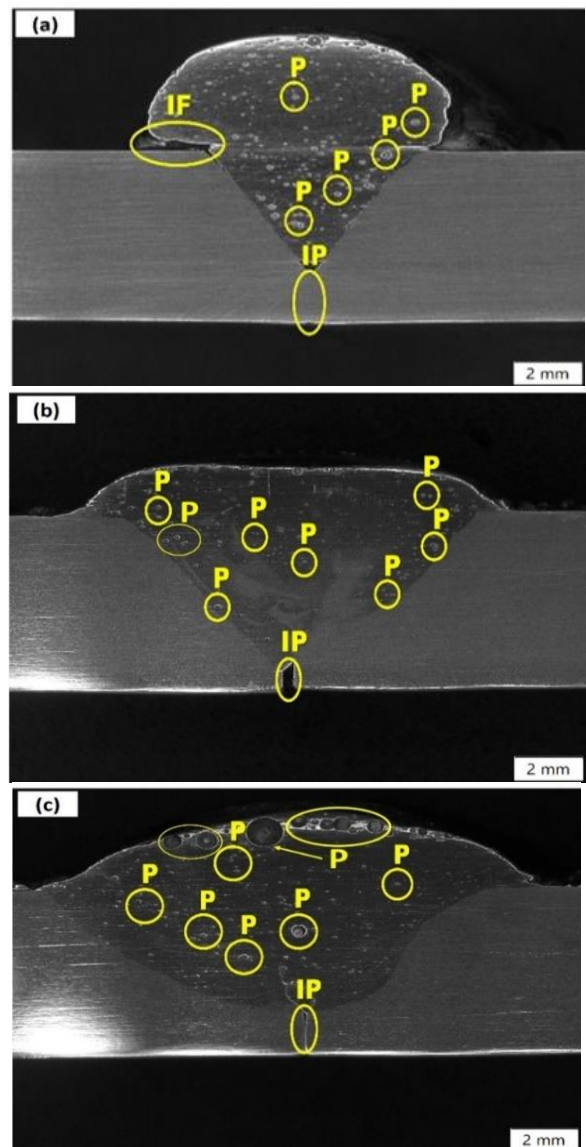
Macrostructure of welded joints at (a) 100 A, (b) 130 A, (c) 160 A.
